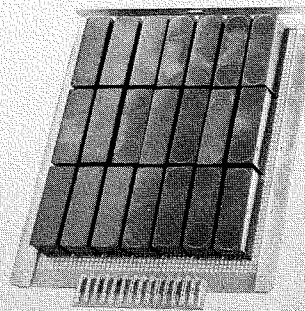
Plug-in card, or mother board, of 21 modules for a military data processing equipment.
